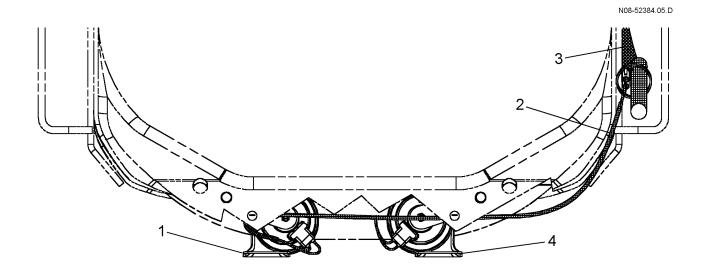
Electric Horn FWD Chassis Wiring Crossmember
